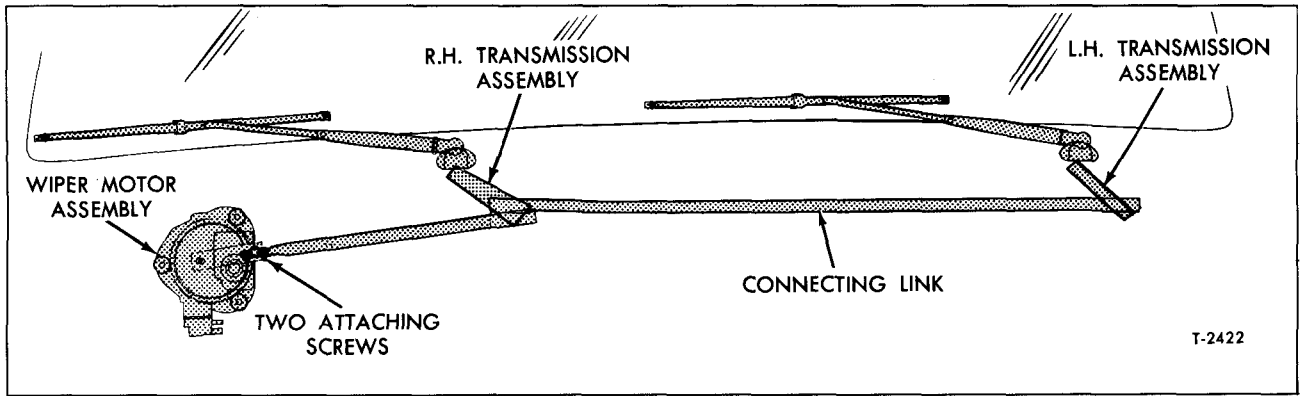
Wiper Motor and Linkage (Series 70 Conventional Cab)
